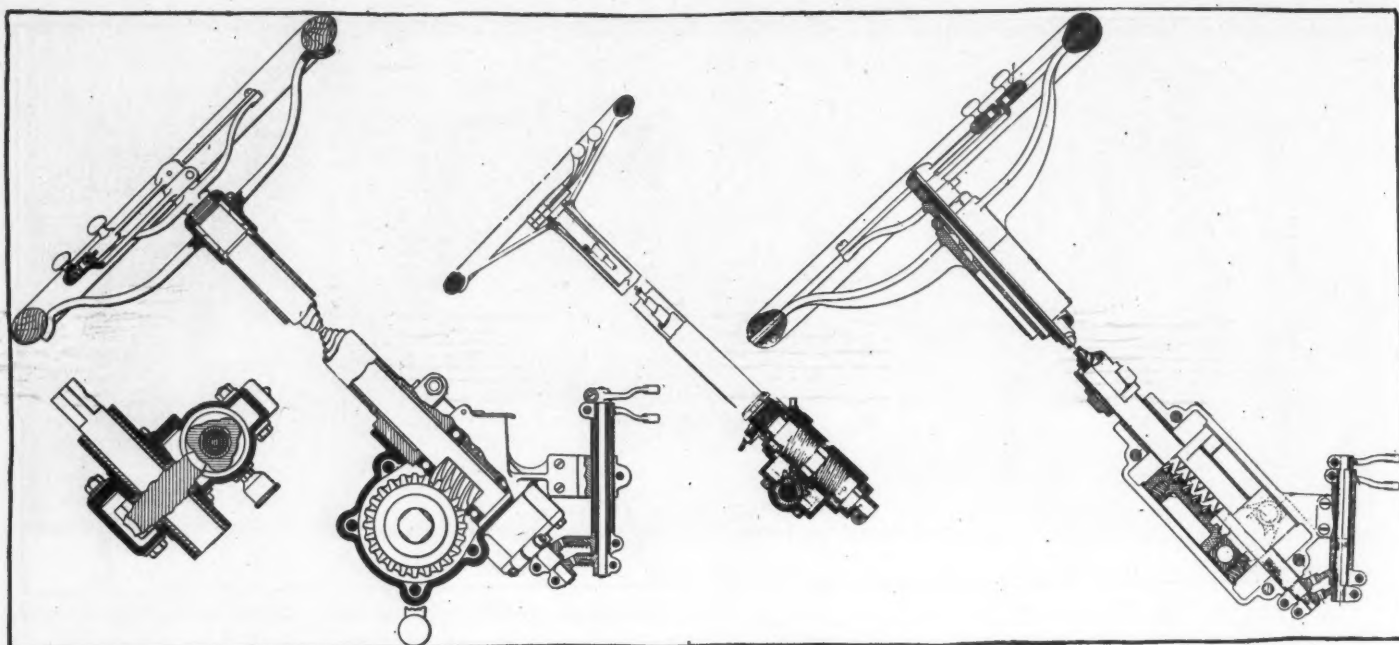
THE GEMMER MODEL K STEERING GEAR THE BARNES WORM AND SECTOR THE LAVIGNE STEERING MECHANISM
